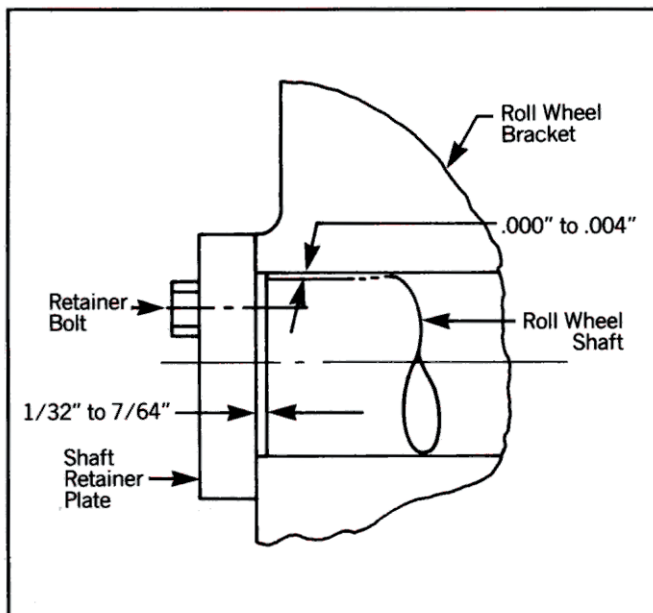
Present tolerances of the roll wheel retainer plate.
